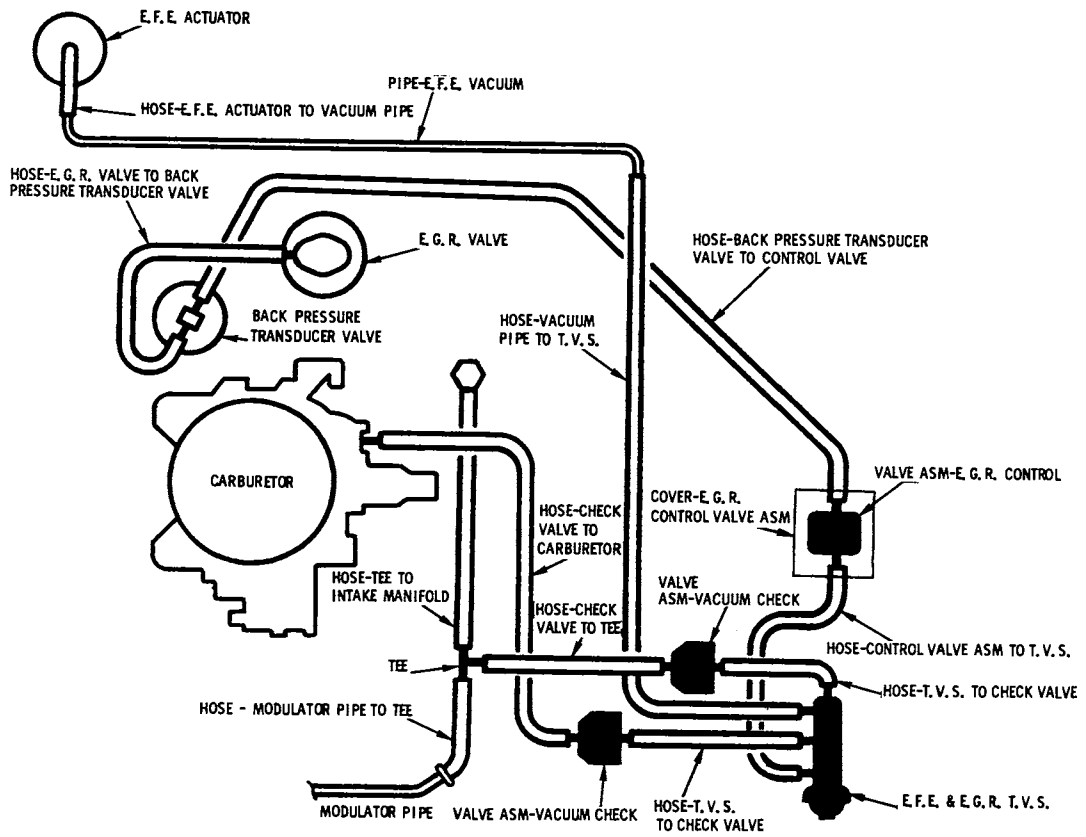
F-29 - 260 Engine Vacuum Hose Routing California
